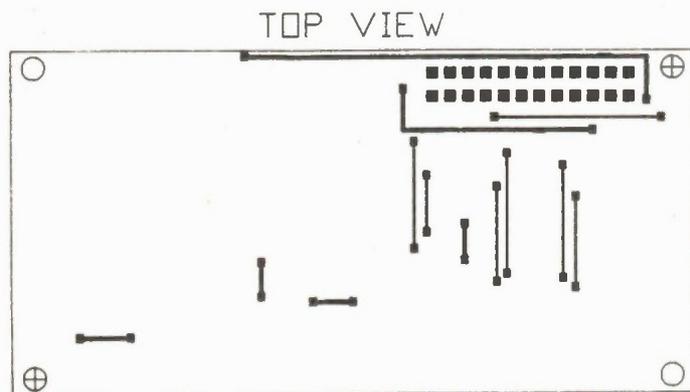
A parts overlay, showing the placement of the jumper wires.
